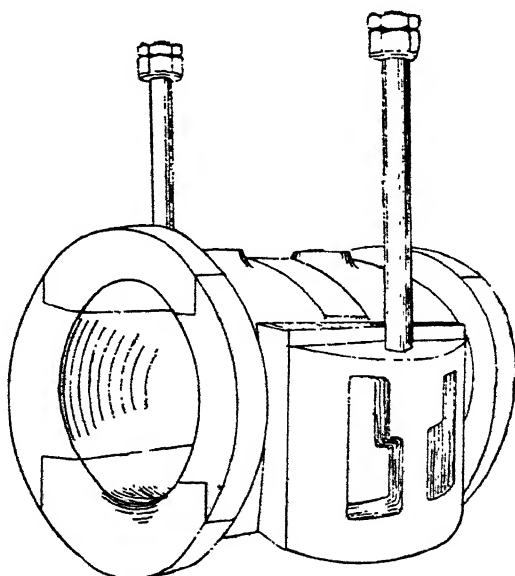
PERSPECTIVE VIEW OF BEARINGS AND WEDGES
